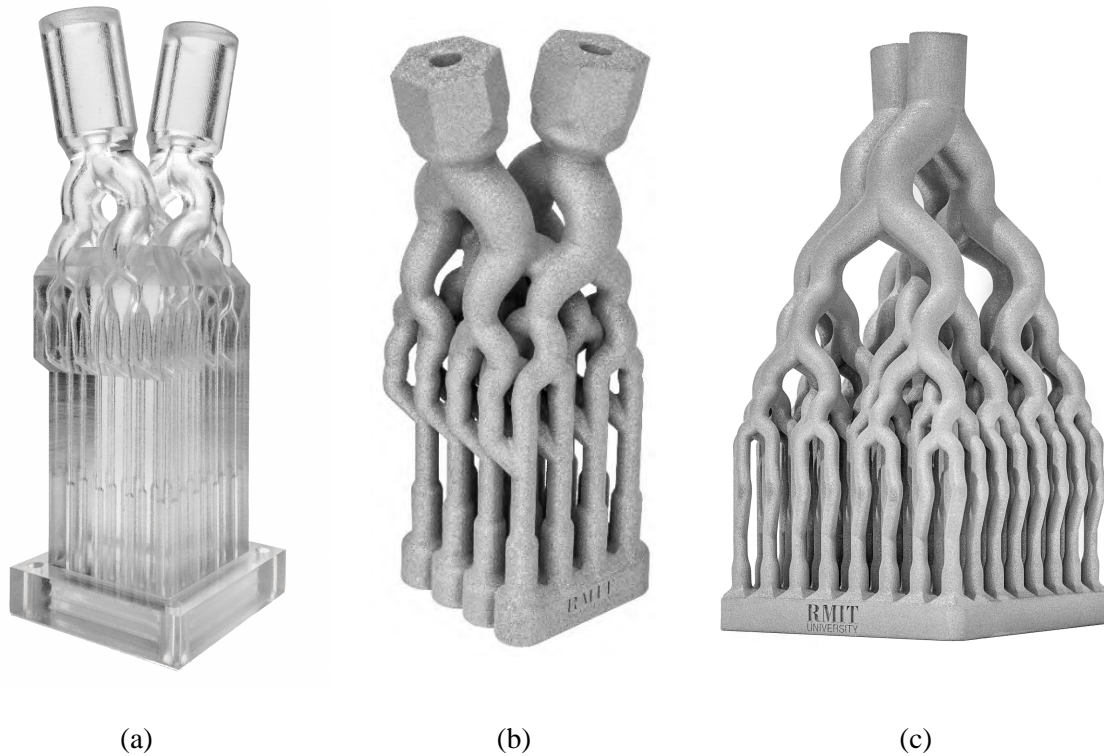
Additively manufactured flow distributor and mixer devices: (a) 4-stage polymer device manufactured (b) 4-stage metal device (c) 6-stage metal device.
